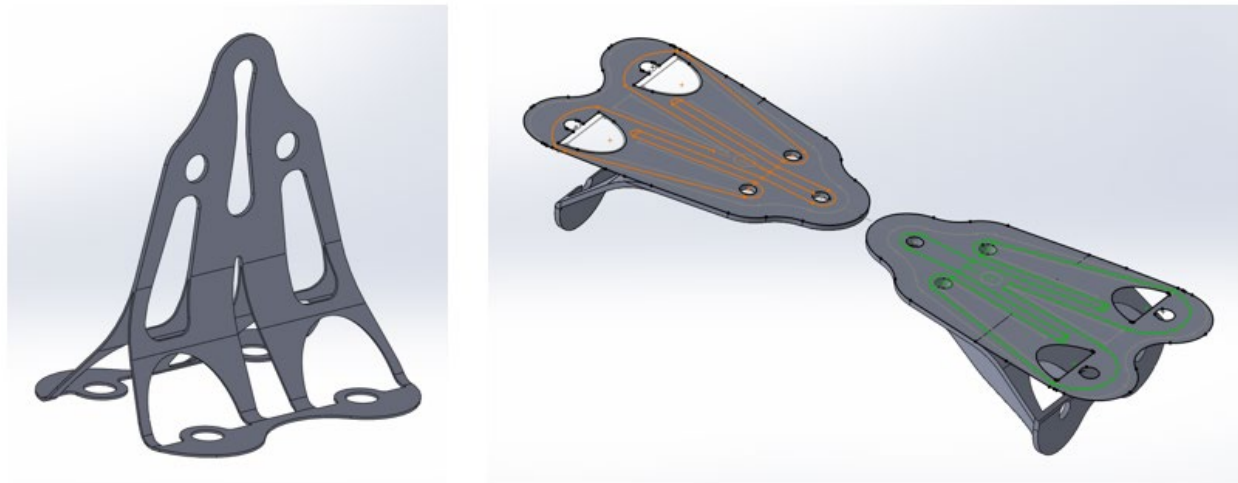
Formed TFP Preform CAD Design (Left), Flat CAD Patterns for TFP Preforms (Right)
